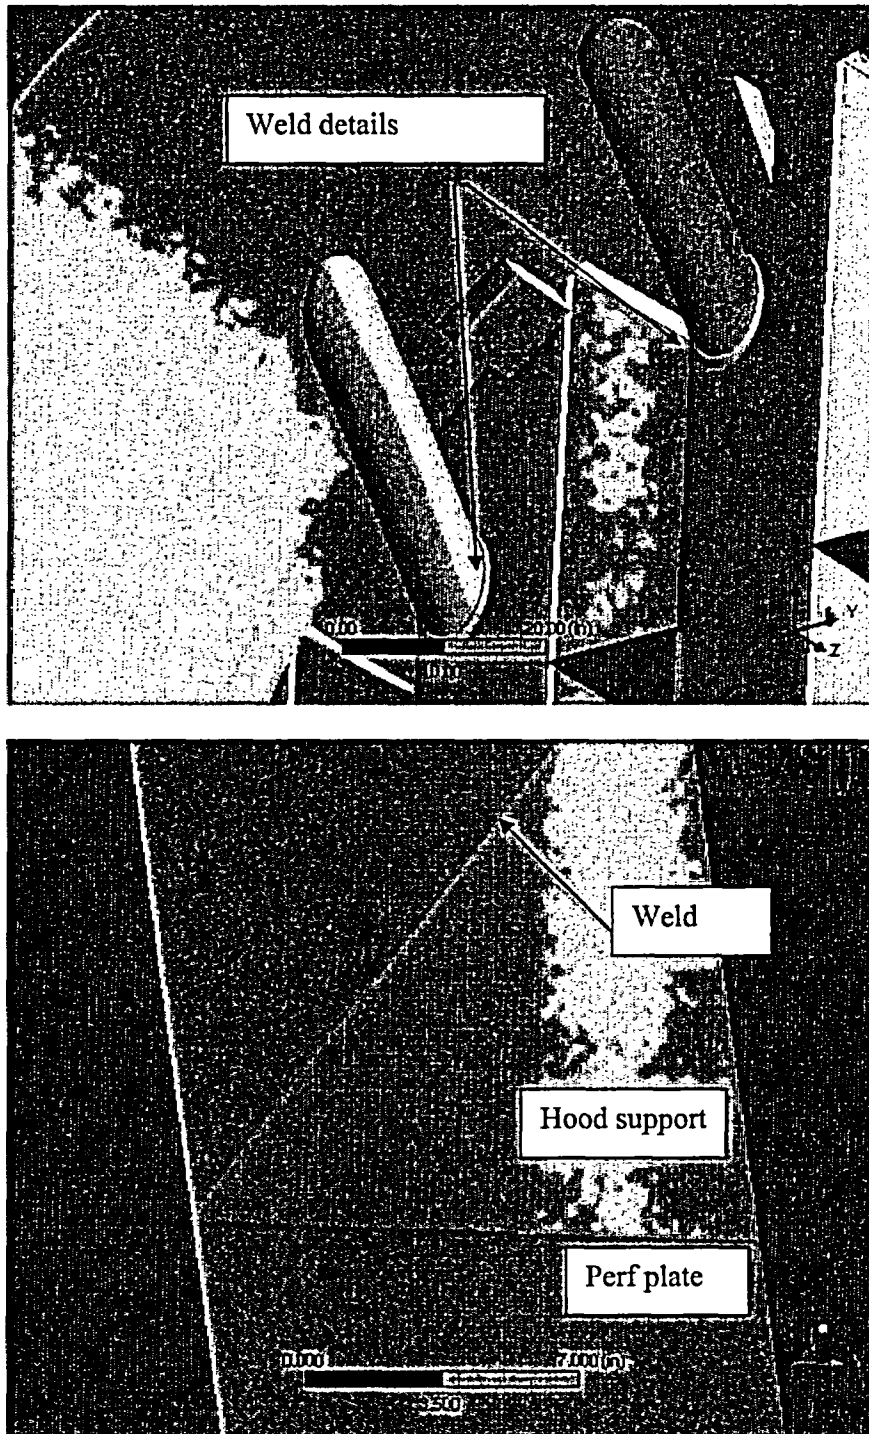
Weld details. Solid elements were added at all drain pipe / trough bottom plate junctions and all hood support / perforated plate junctions (both sides), at 28 locations on the dryer.
